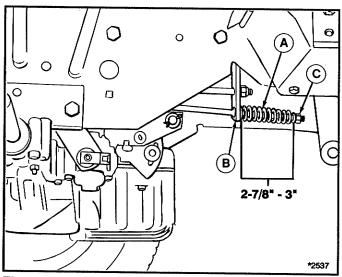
Brake Spring Adjustment - Hydro Models (Mfg. Nos. 1692259, 1692263)
